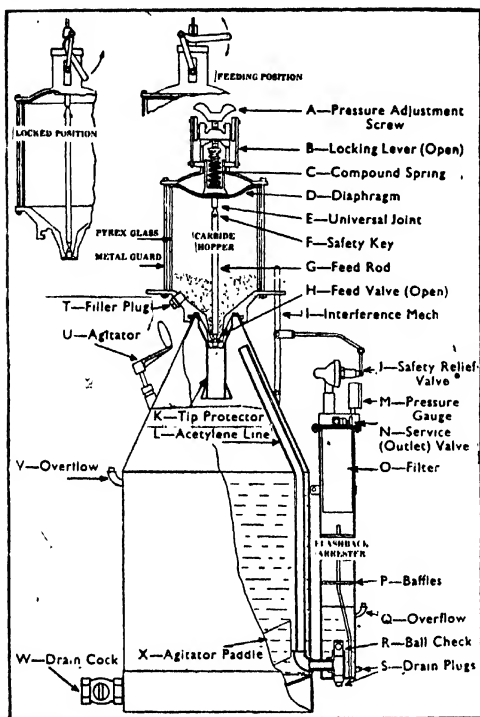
PORTABLE SIGHT-FEED ACETYLENE GENERATOR
